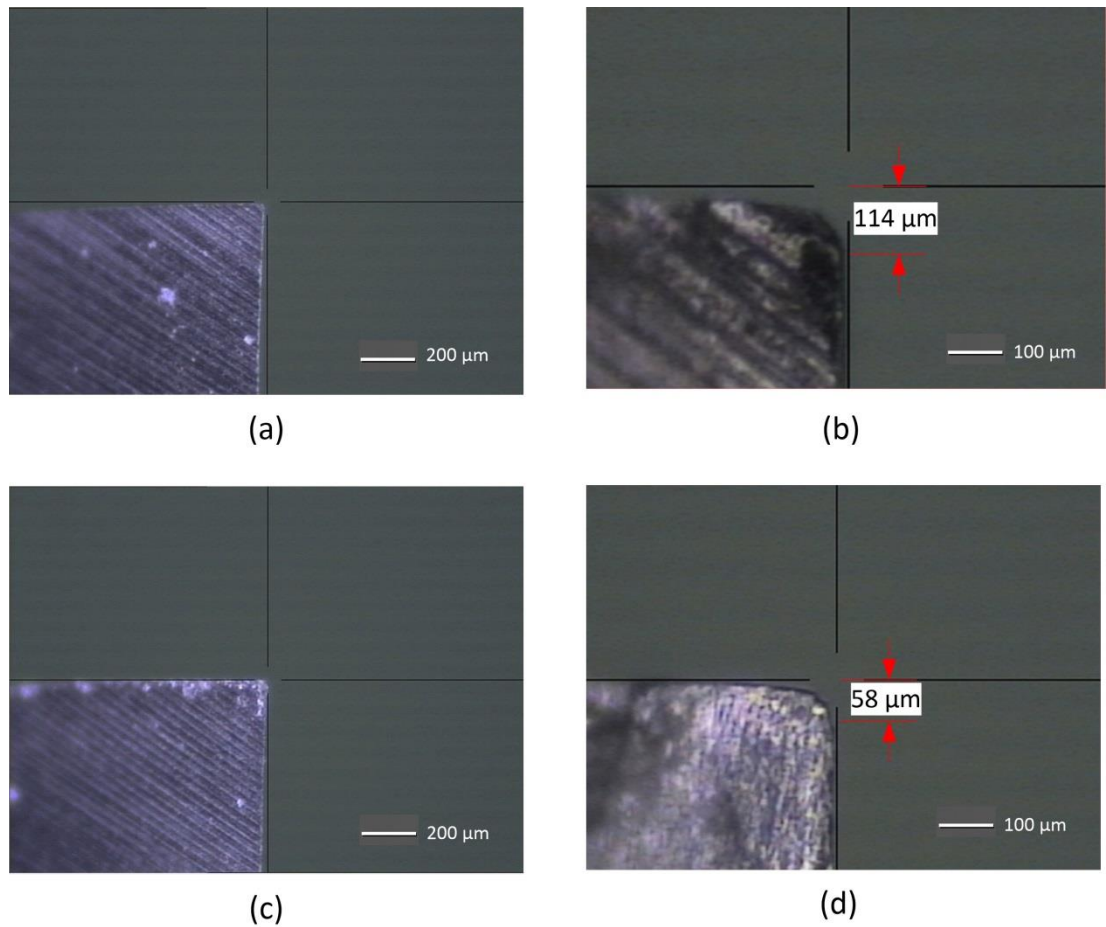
Tool wear cutting edge before and after machining: (a) Roughing tool before machining, (b) Roughing tool after machining, (c) Finishing tool before machining, and (d) Finishing tool after machining
